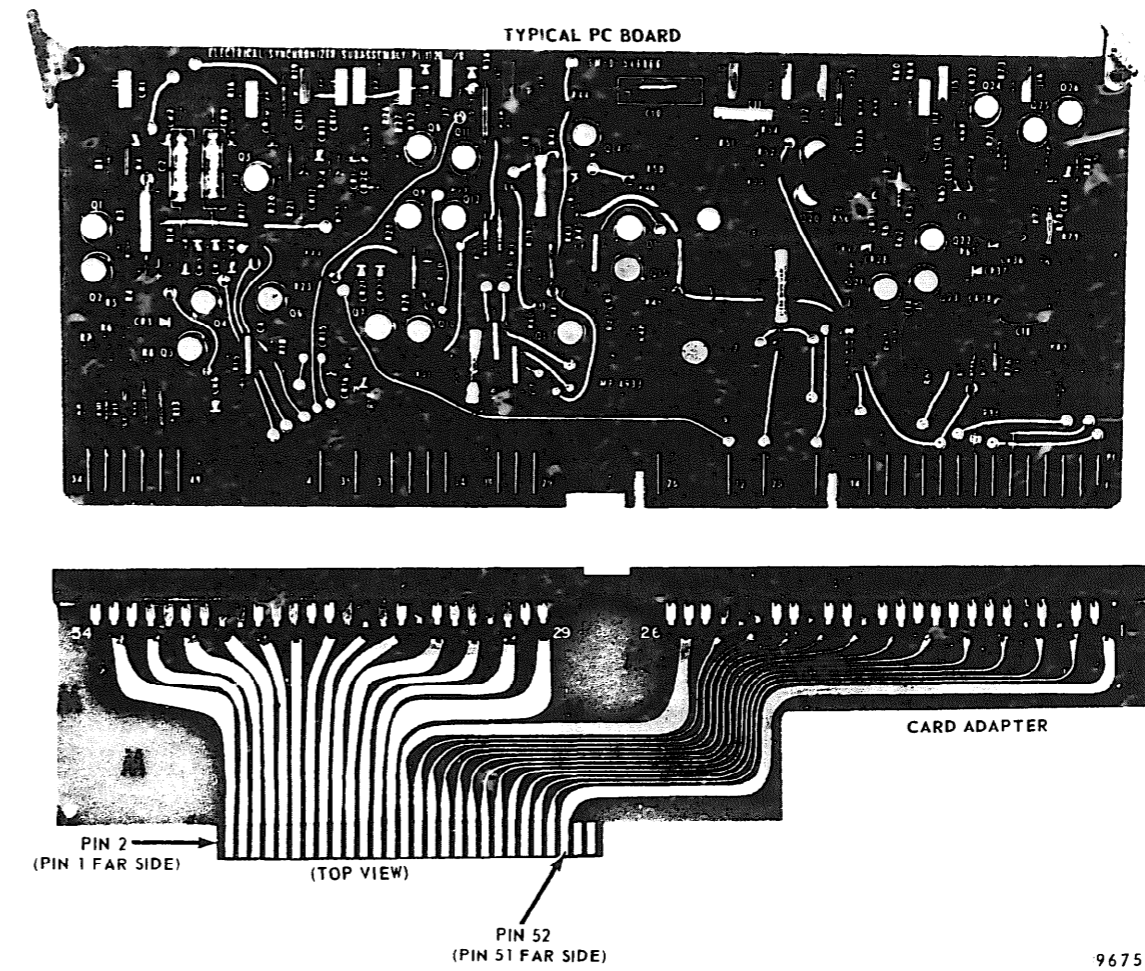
Printed Circuit Card Adapter MX-9092/USM-371
